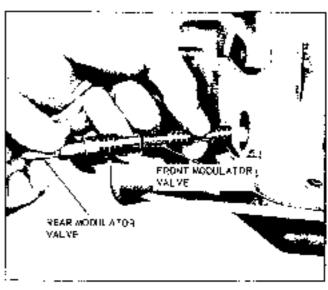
F-16 Removing Vacuum Macalstar Valve Assembly
